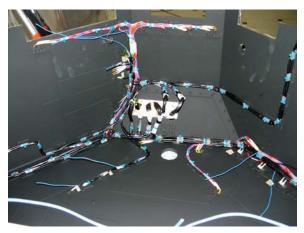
Inside view of final black painted Optical Bench Thermal Hood
